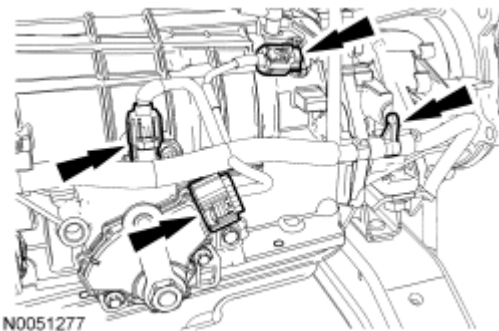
Locating Wiring Harness Retainer & Transmission Electrical Connectors
